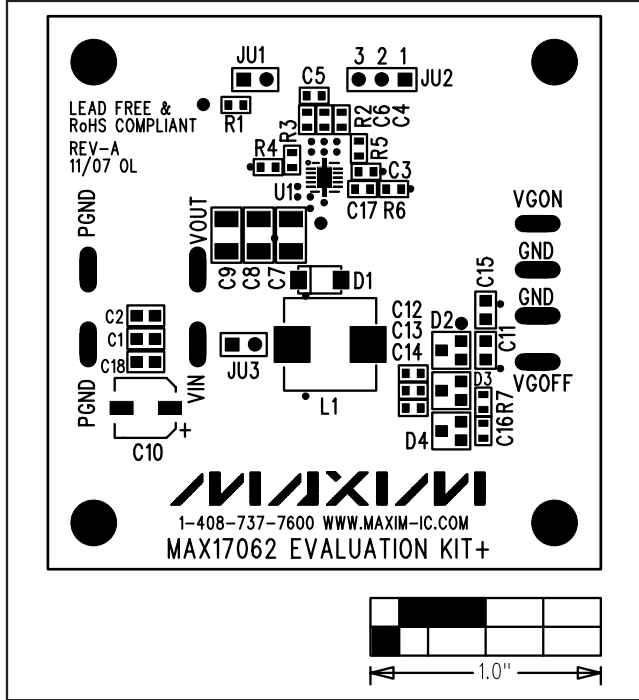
MAX17062 EV Kit Component Placement Guide—Component Side
